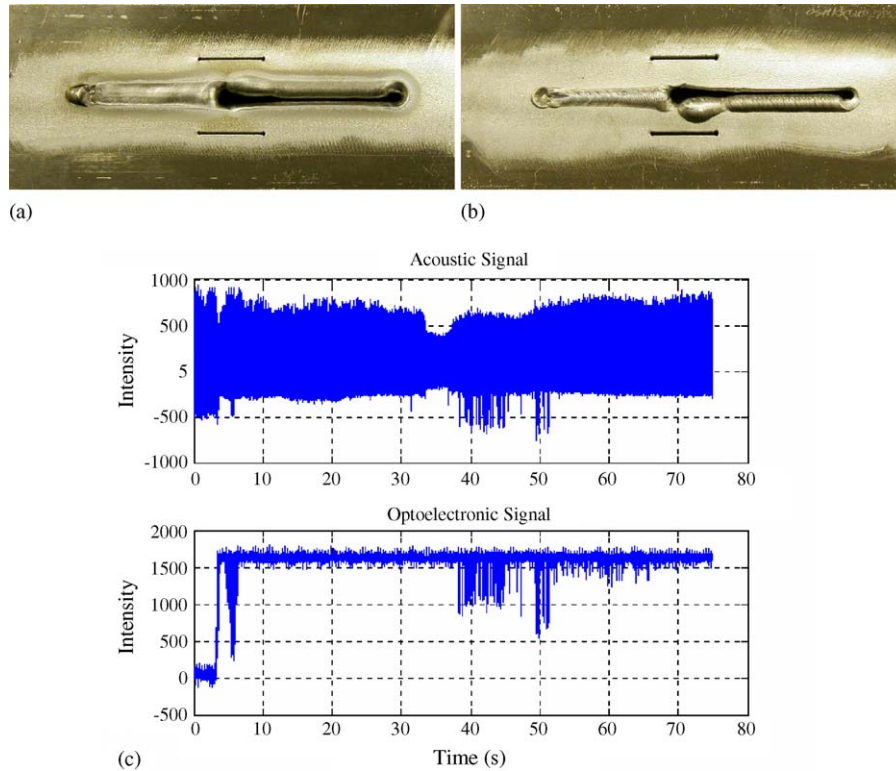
Results of Experiment III—VPPA welding process with pre-drilled hole and variable heat sink. (a) Front-side photograph of workpiece; (b) back-side photograph of workpiece; (c) acquired signals.
